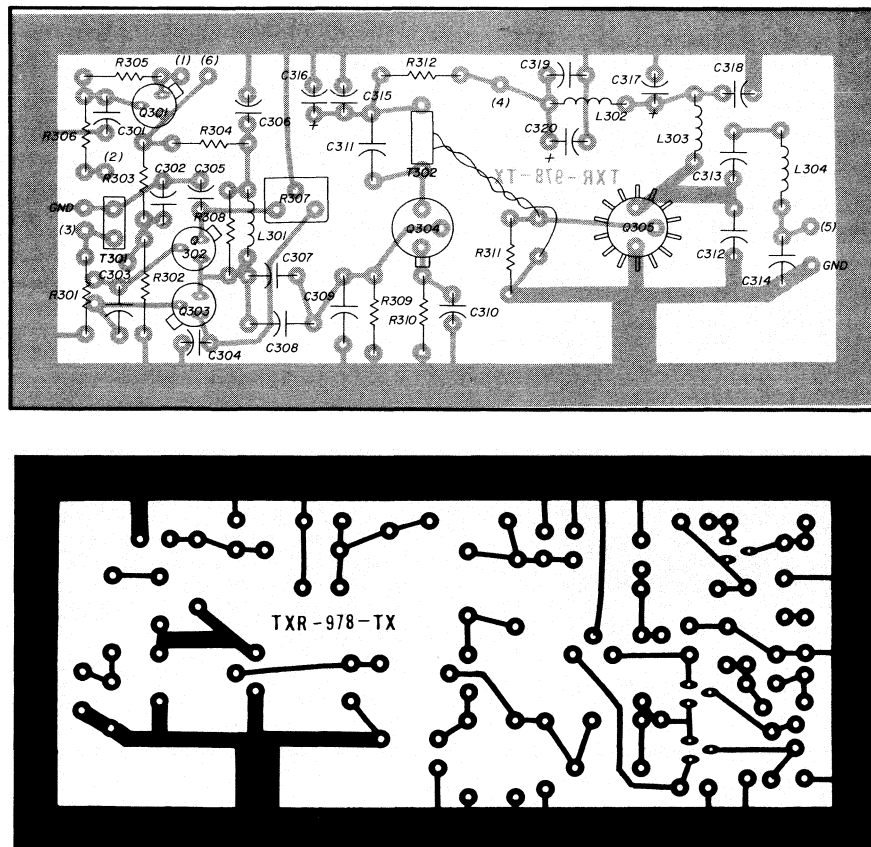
Above, transmitter-board parts layout. Below, transmitter board, foil side.
